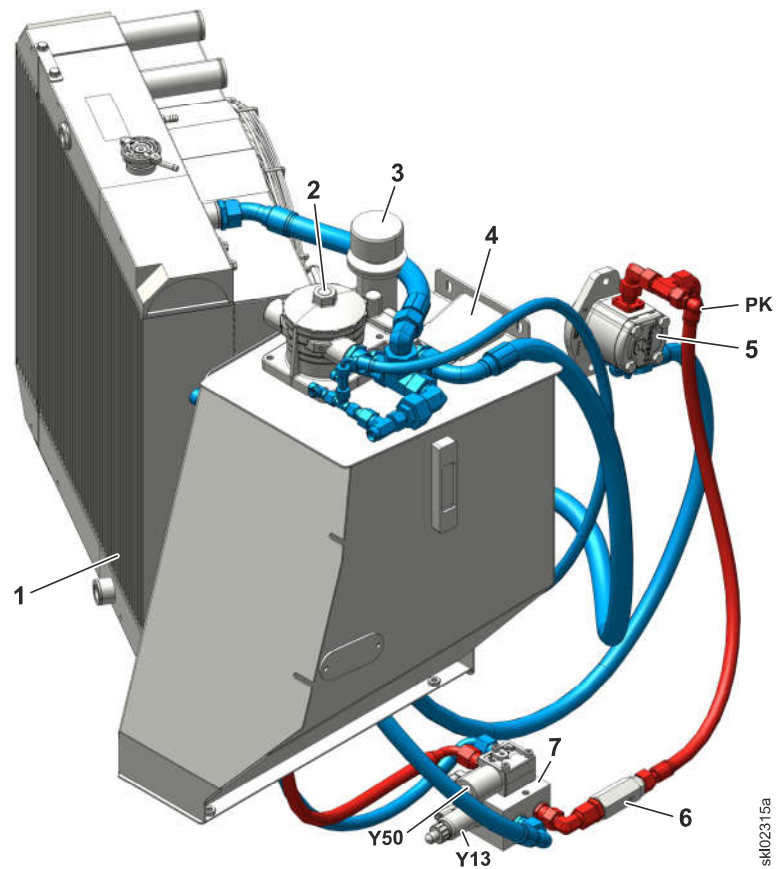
Reversible fan drive (diesel engine running) (from front left)
